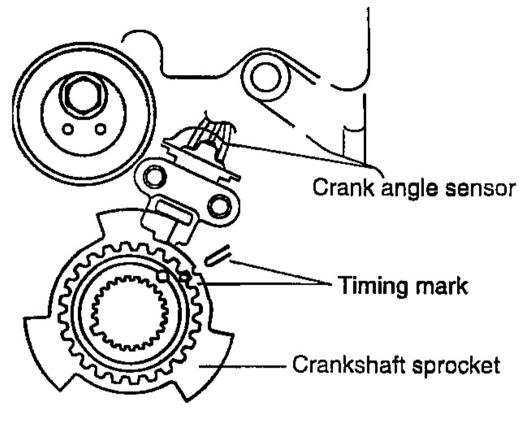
Installing The Crankshaft Sprocket Courtesy of KIA MOTORS AMERICA, INC.
